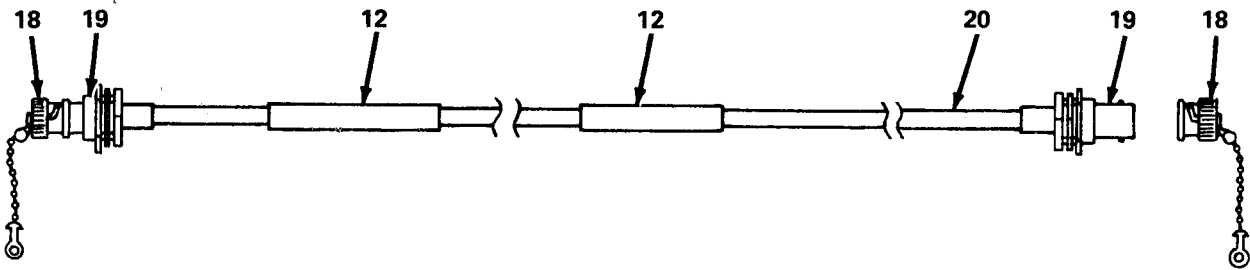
Cable and Wiring Assemblies (Sheet 1 of 4)
